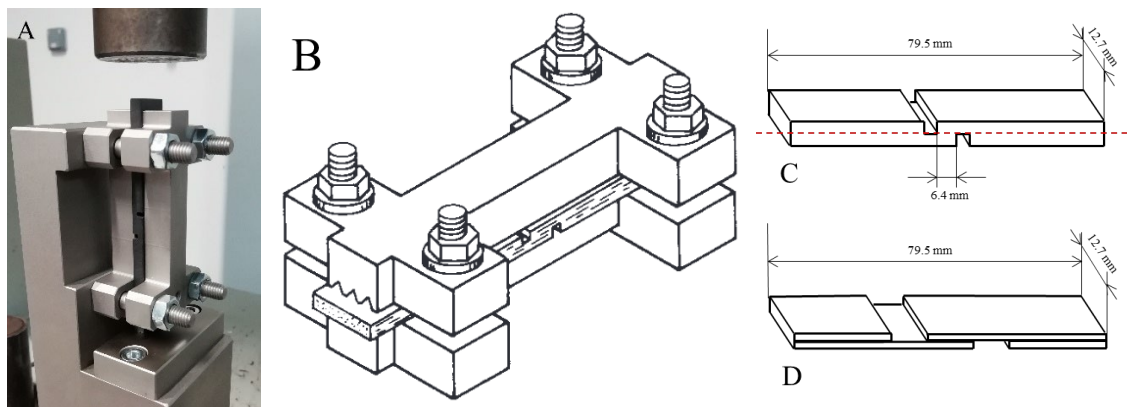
(A) DNS testing equipment on CF/PEEK composite, (B) scheme of the DNS equipment according to ASTM D-3846, (C) Standard DNS specimen, (D) Quasi-DNS welded specimen.
